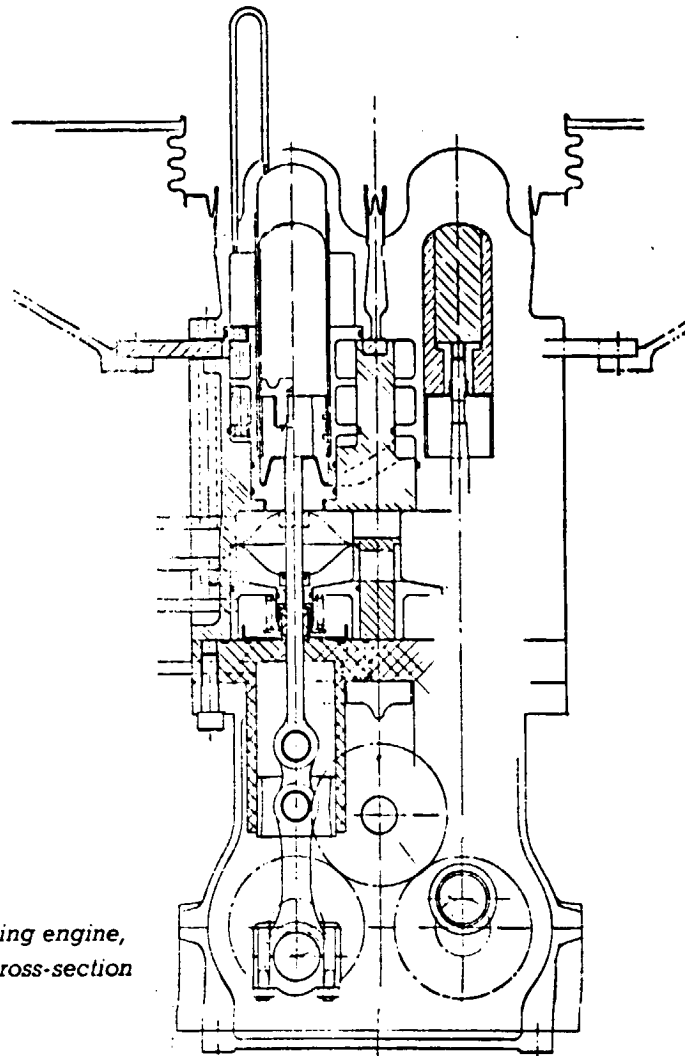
Four-cylinder double-acting engine, annular regenerators — cross-section
